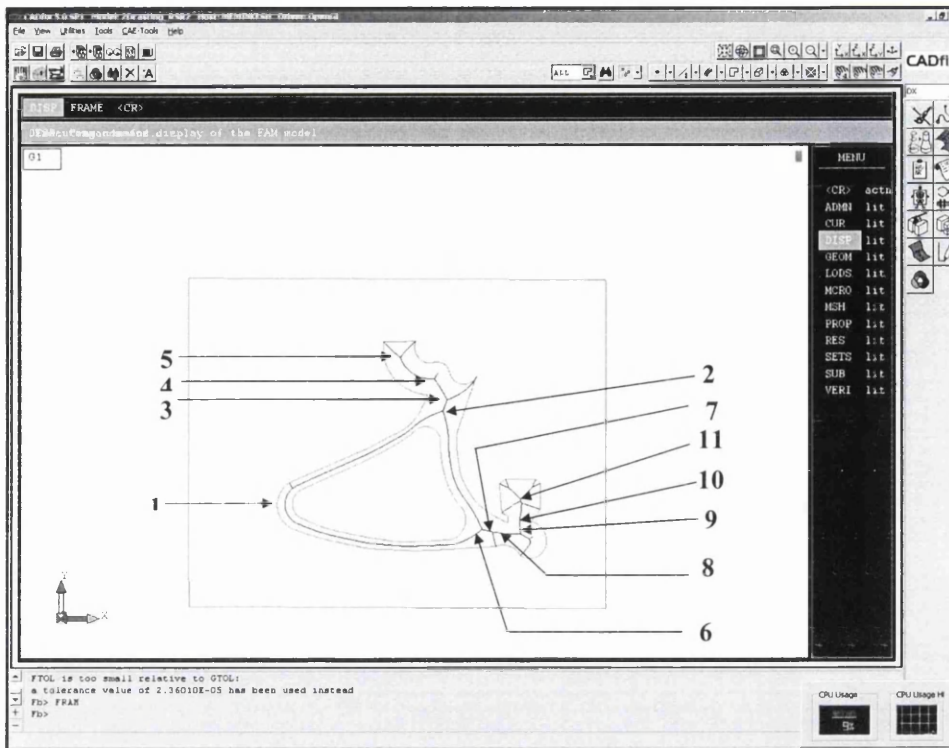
A two-dimensional casting section showing medial axis and important medial points obtained using CADfix [2]
